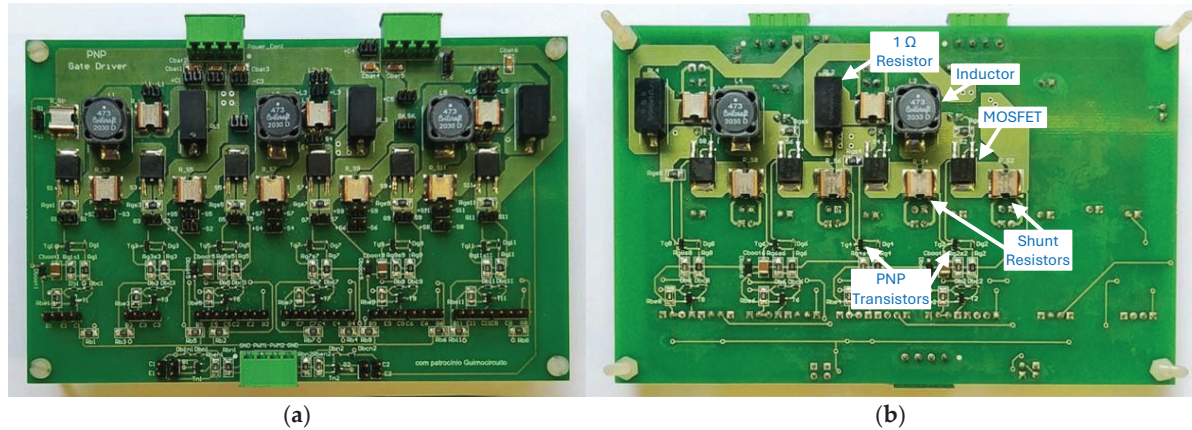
Prototype board of the 6-cell switched inductor converter for the BMS active cell balancing circuit: (a) Top view of the prototype board; (b) Bottom view of the prototype board.
